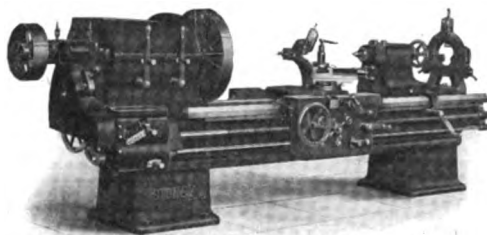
25 x 10 All Geared Head Heavy Pattern
